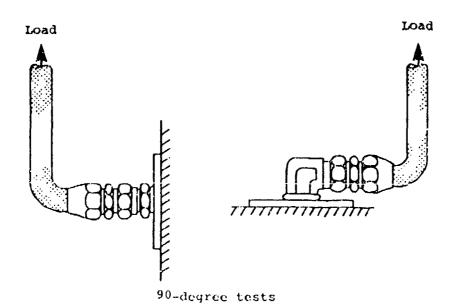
HOSE ASSEMBLY TEST MODES.
